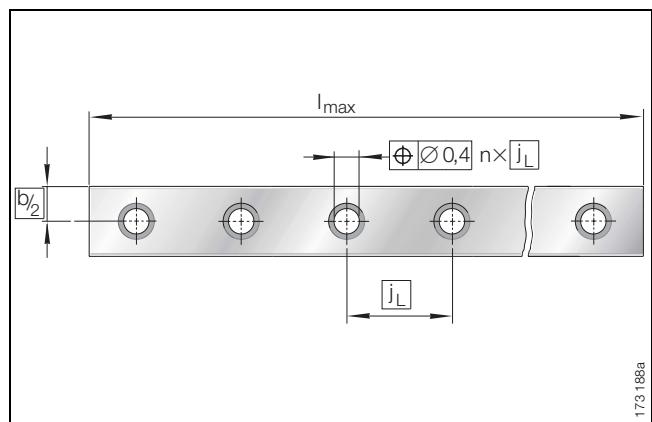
· Positional and length tolerances of guideways – hole pattern to ISO 1101
